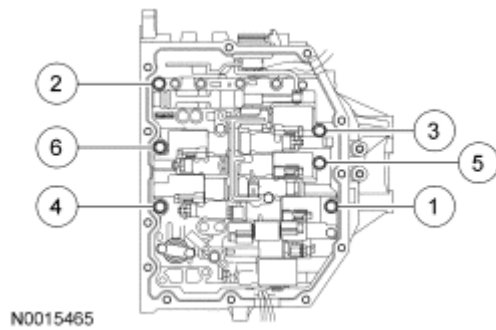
Identifying Main Control Valve Body Bolts Sequence
